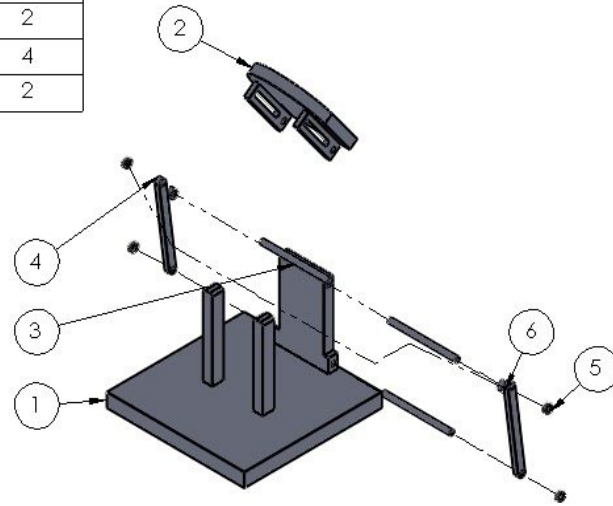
Drawing of Linkage Prosthesis with Labeled Components
